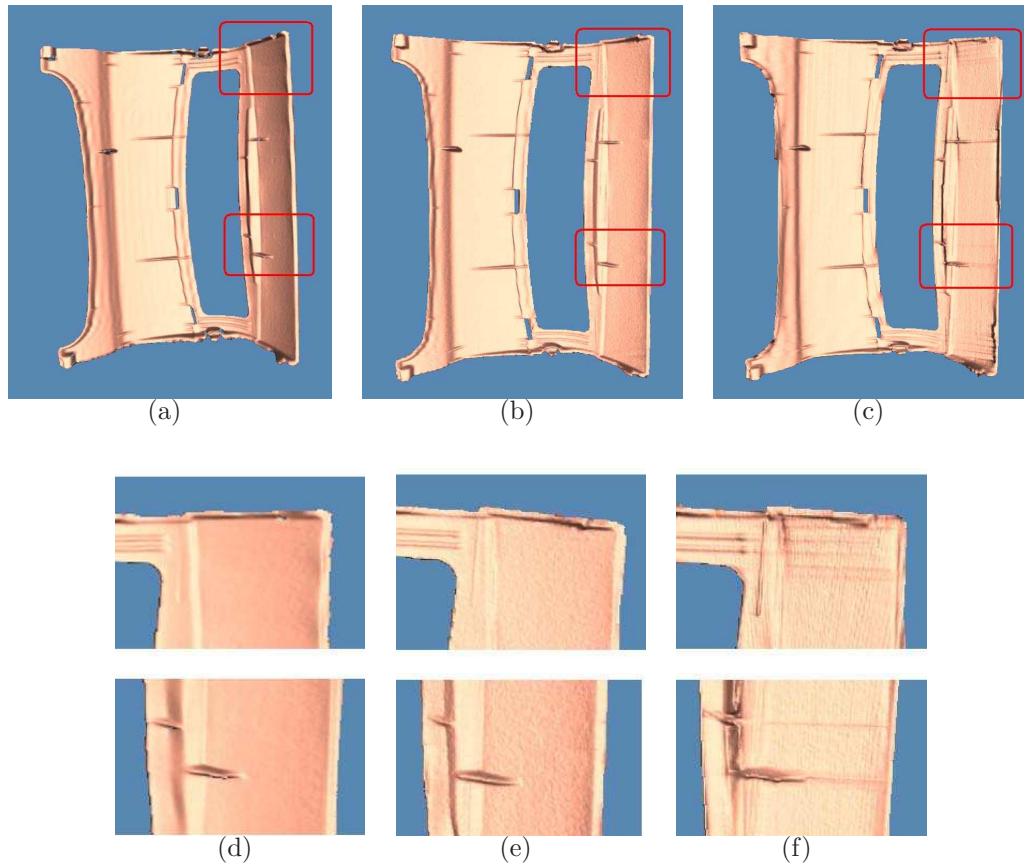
3-D measurement results of a free-form part. (a) Flat+fringe pattern scheme; (b) Three phase-shifted fringe pattern scheme; (c) Conventional FTM method; (d) Zoom-in view of (a); (e) Zoom-in view of (b); (f) Zoom-in view (c).
